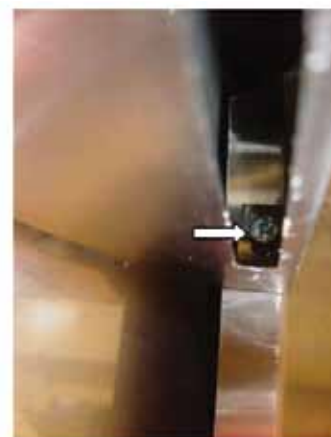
shows the side screws location accessed through the rear slotted opening in the panel.
